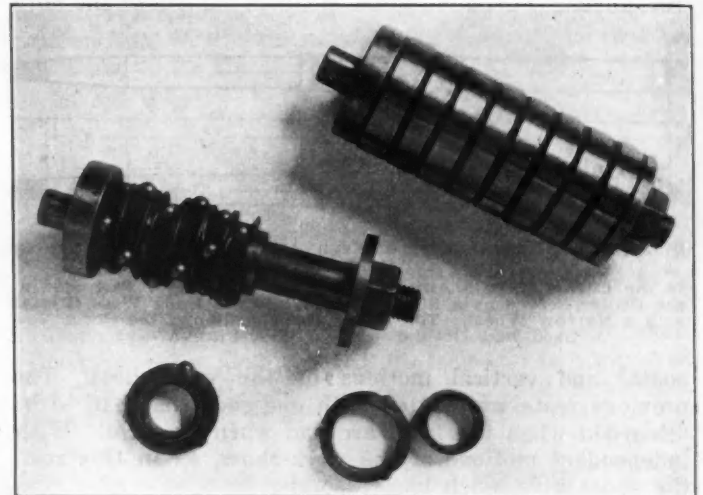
A SPECIAL ARBOR FOR GRINDING THE RINGS OF BALL AND ROLLER BEARINGS
